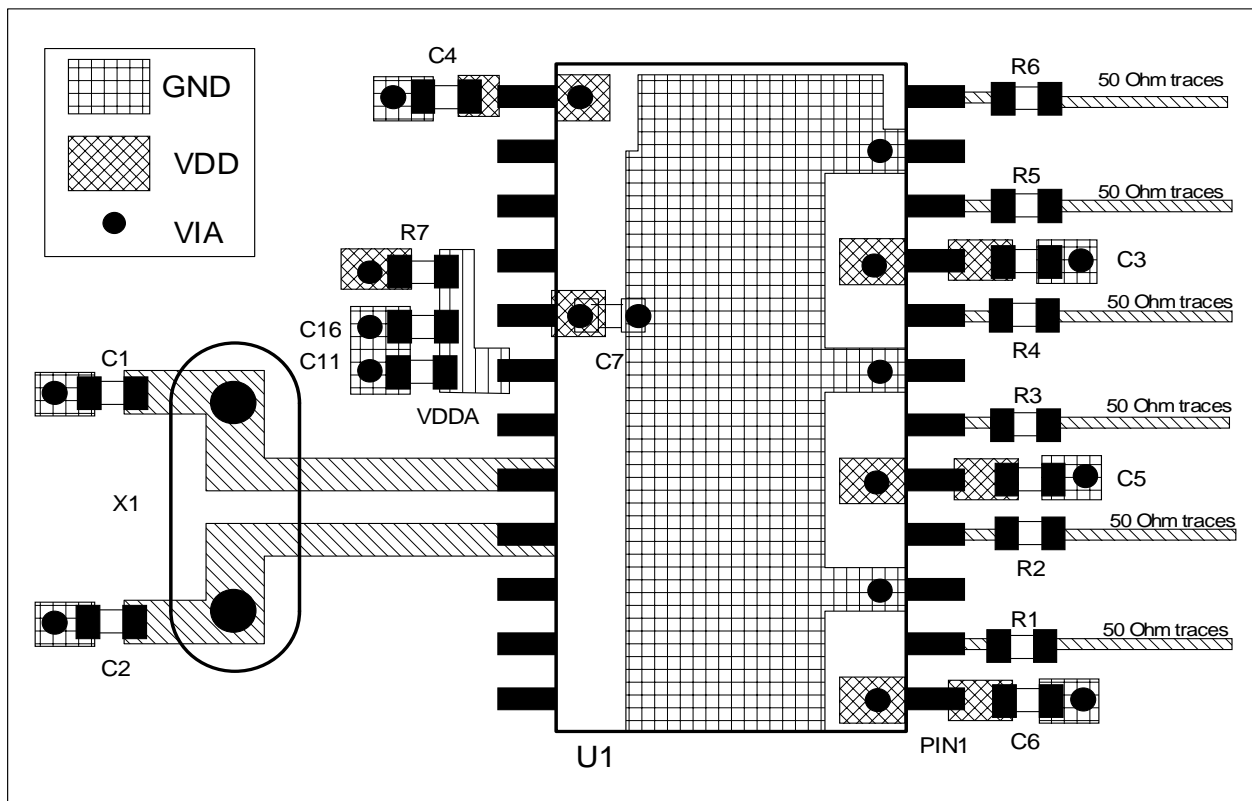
B. PCB BOARD LAYOUT FOR ICS84025
